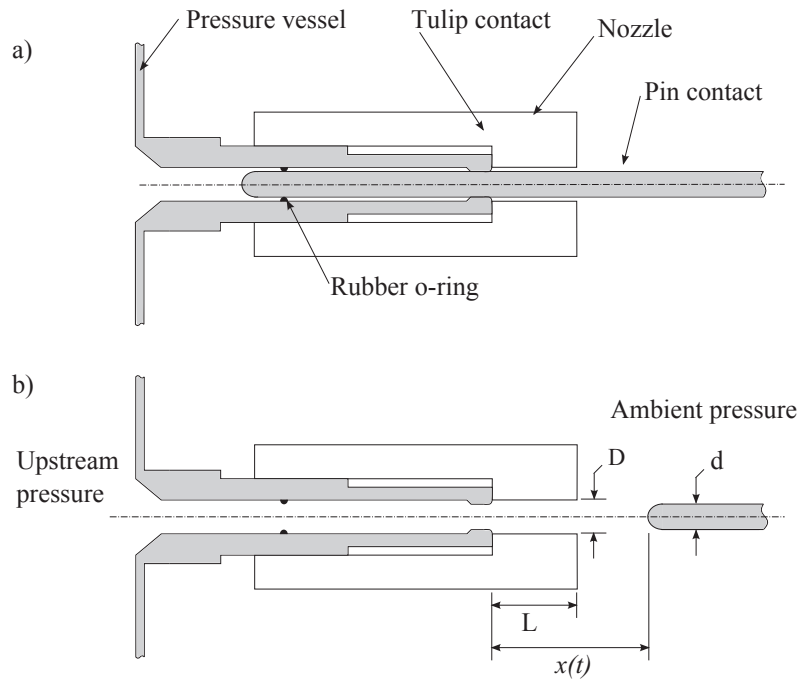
Cross-section drawings of the contact and nozzle area; a) in closed position and b) when the pin contact is moving, about halfway to fully open.
